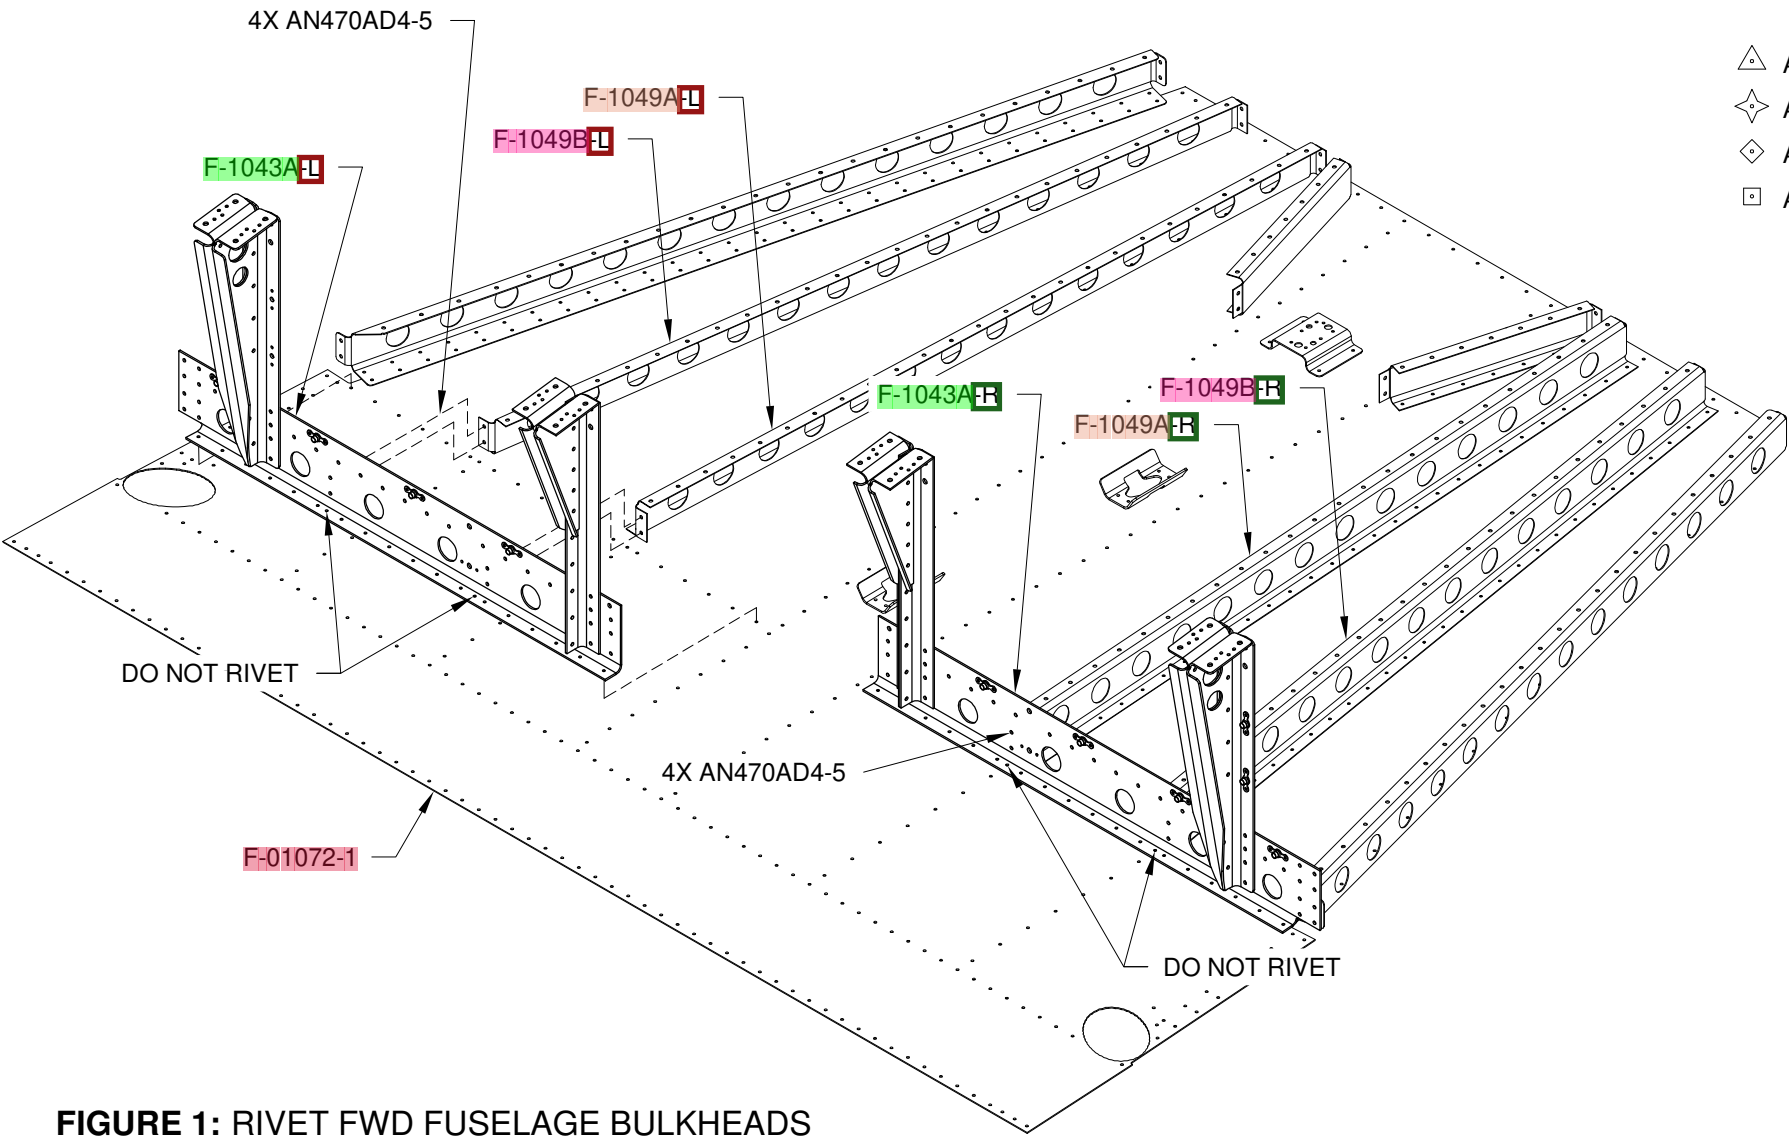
RIVET FWD FUSELAGE BULKHEADS TO FWD FUSE BOTTOM SKIN
